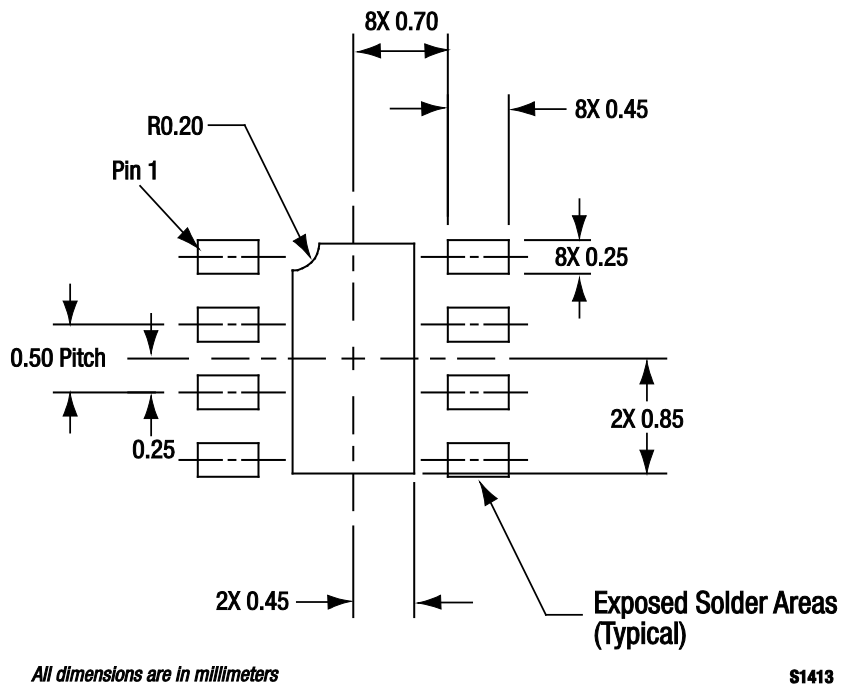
SKY67014-396LF PCB Layout Footprint (Top View)
